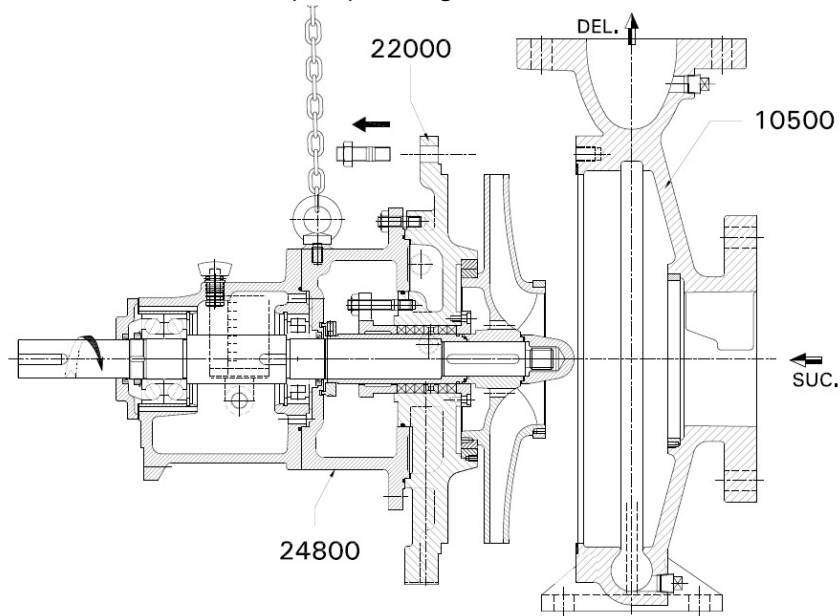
Removal of back pull out assembly – casing cover is not sandwiched
